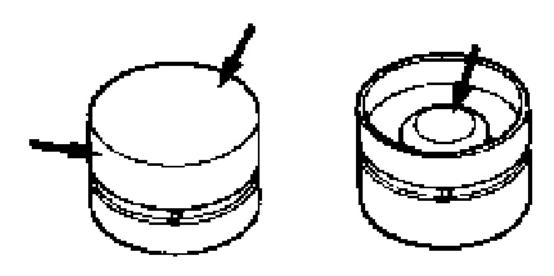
Checking Adjuster For Pitting Or Damage Courtesy of SUZUKI OF AMERICA CORP.
